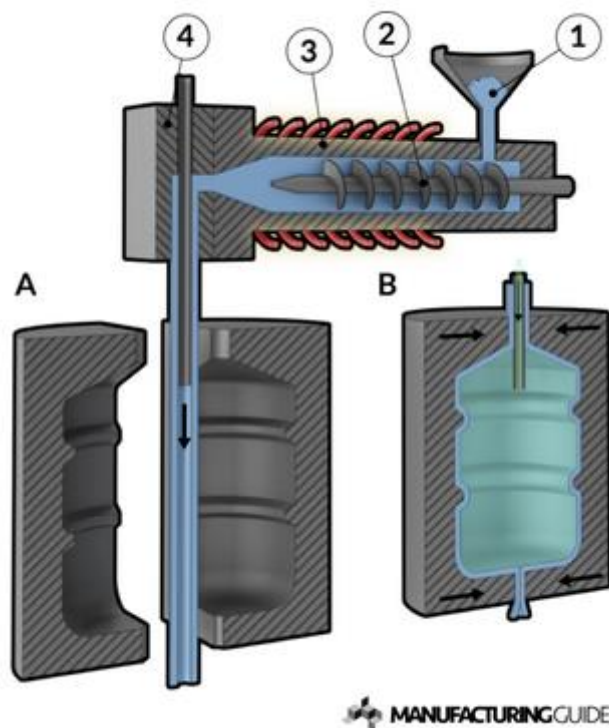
Extrusion Blow Molding process. From [20]. CC-BY.
